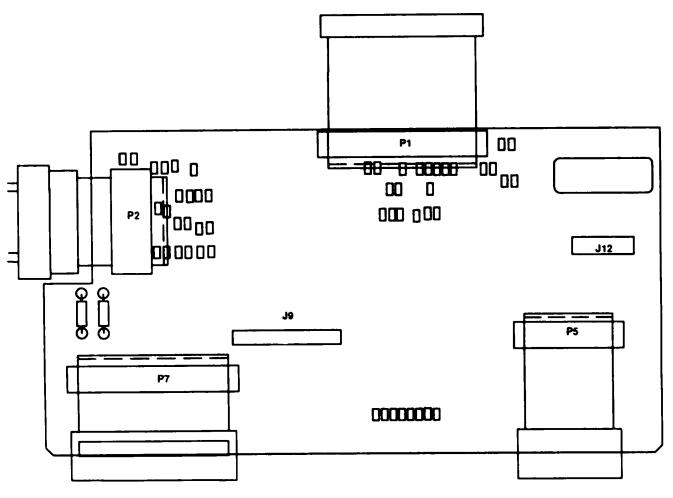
A11 Motherboard Assembly Component Location Diagram (10303-2170 Rev. E)
